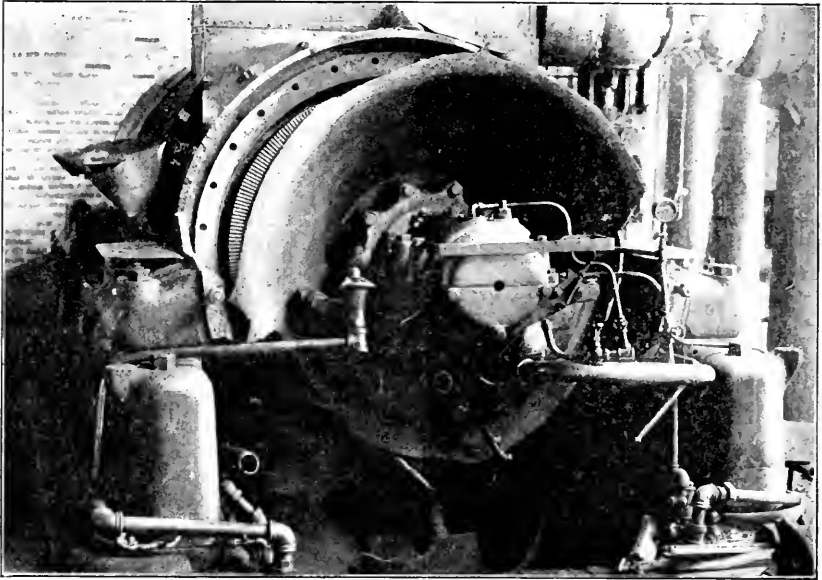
A CLOSER VIEW OF THE DAMAGED CASING.
